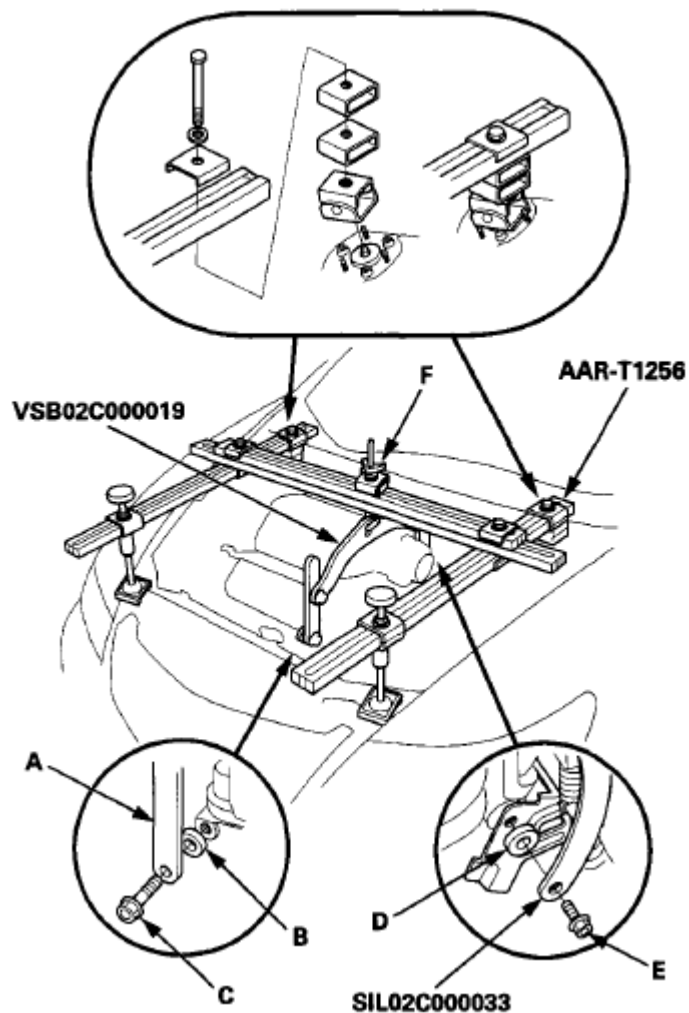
Attaching Front Arm To Front Cylinder Head With Spacer
